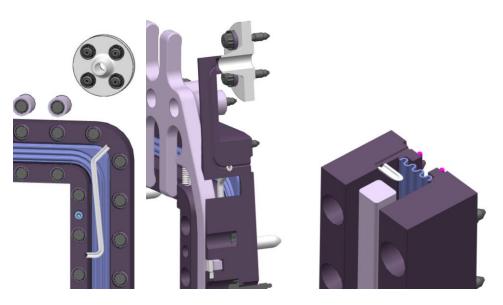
Left: cross-section showing flanged connector and distribution to the outer seal ambient side. Right: planar cross-section showing helium feed for leak detection from outer to inner flange (line should have more flexibility in the future).
